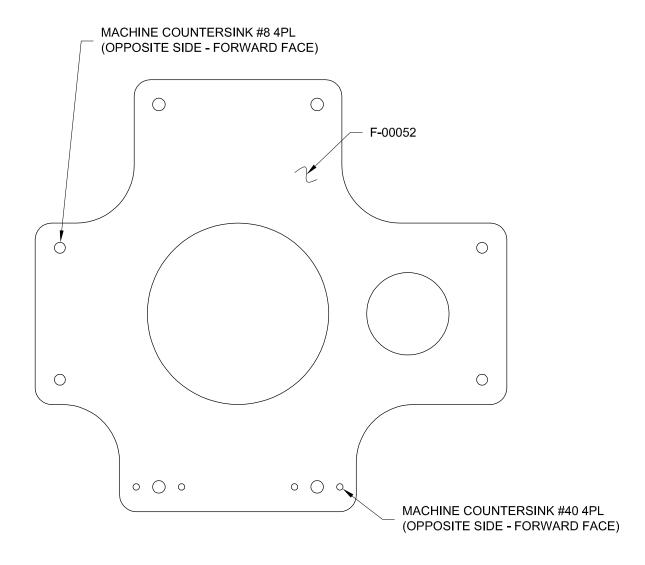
PREPARING THE ATTACH PLATE (AFT FACE SHOWN)
